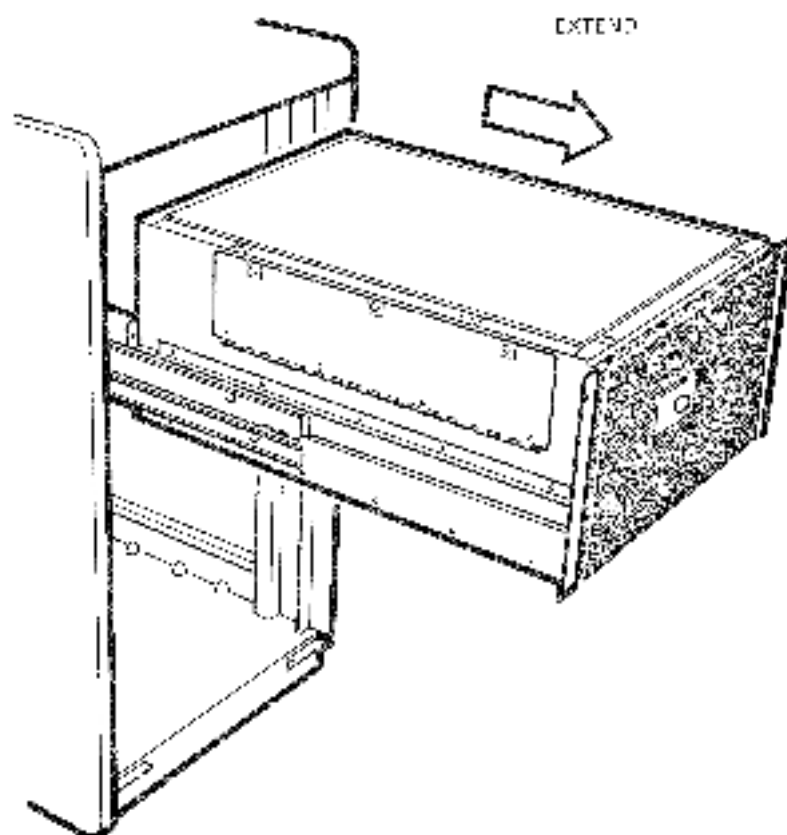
CIPA Mounting Box - Access (Sheet 2 of 3)
